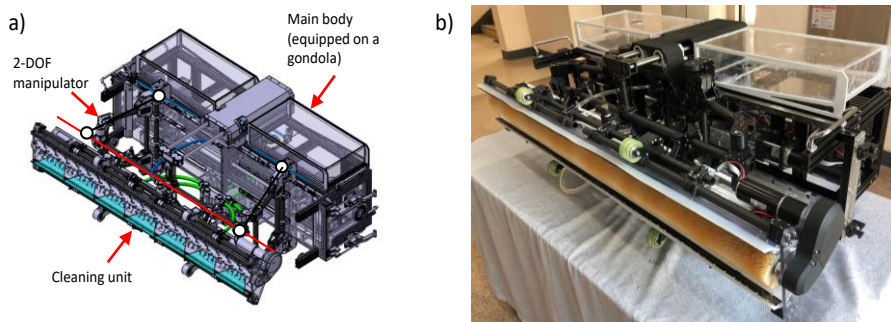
a) Prototype design and b) photograph of the assembled prototype.
